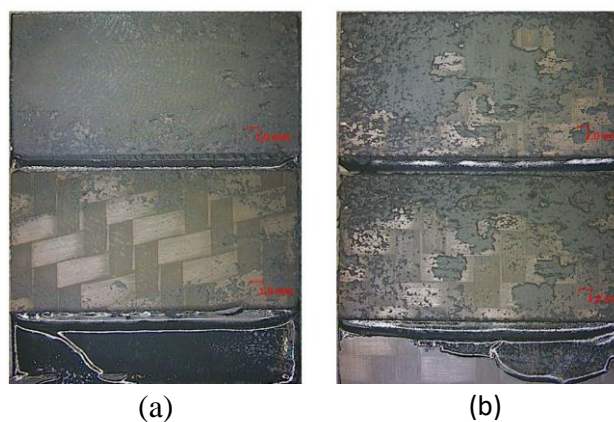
Fracture surfaces of (a) degreased-only and (b) abraded samples.
